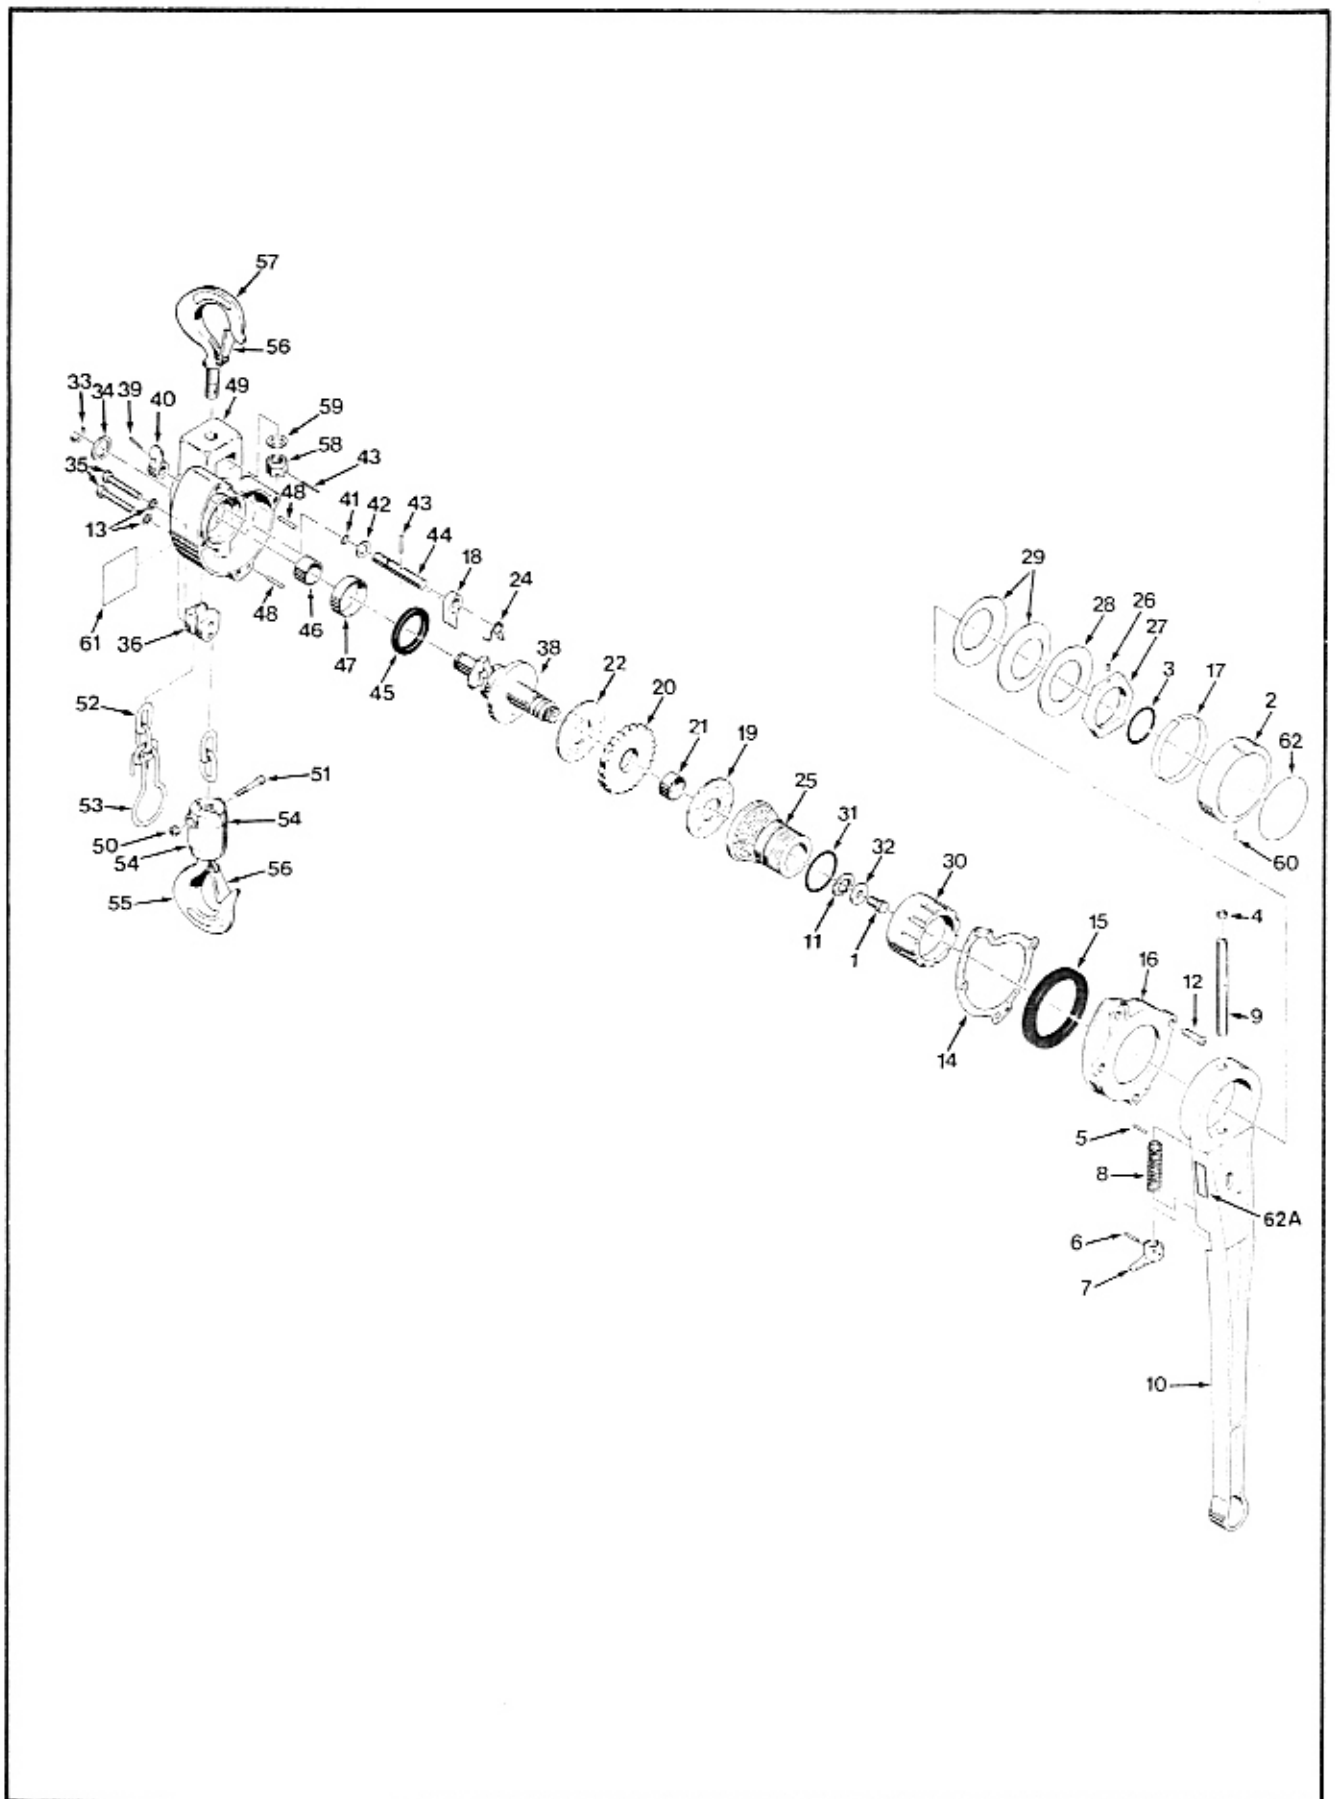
EXPLODED ILLUSTRATION OF MODEL MAL-15 HOIST
